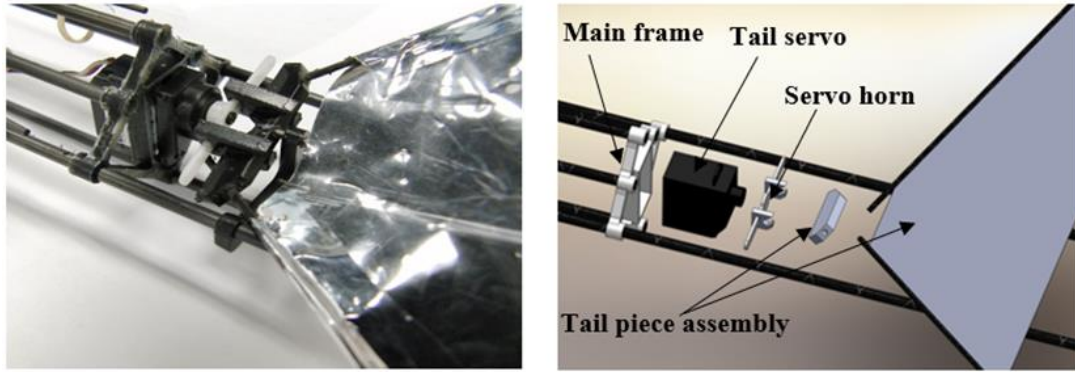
Tail drive subsystem assembled (left) and exploded view (right)
